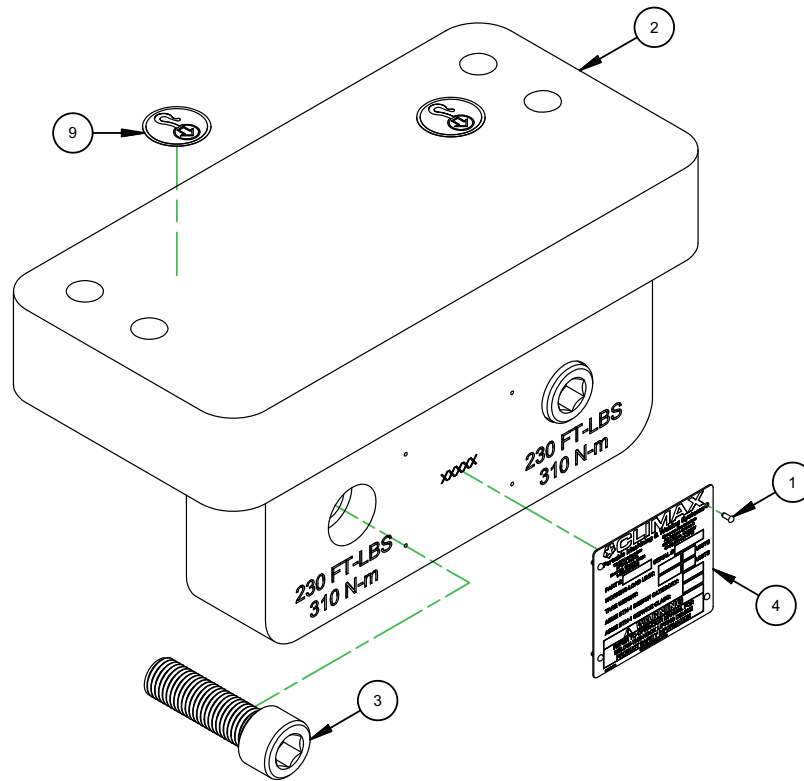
ROTARY TABLE ASSEMBLY PARTS LIST (P/N 96031)
